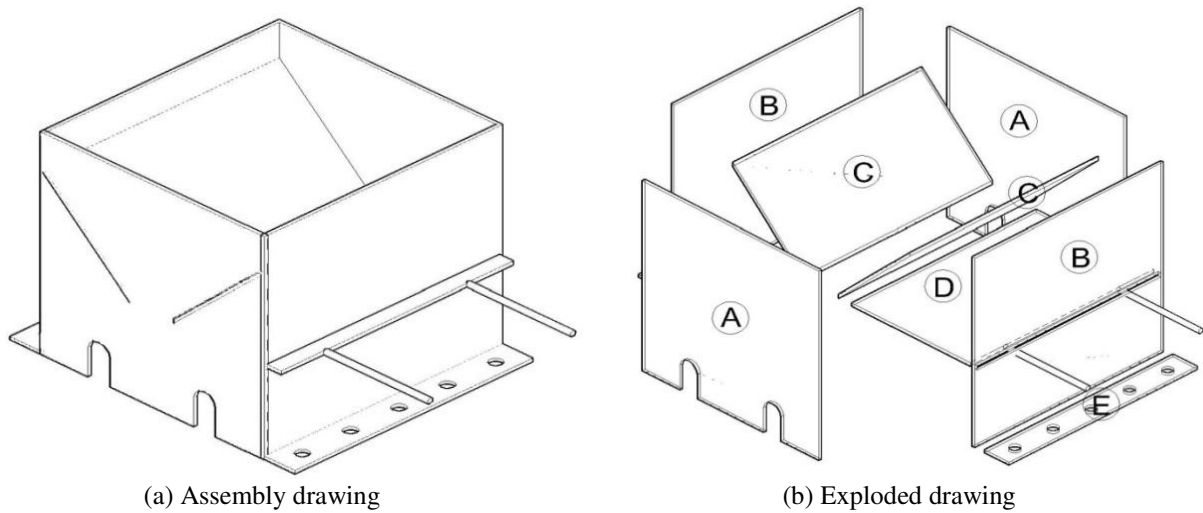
Assembly drawing (a) and exploded drawing (b) of the hopper.
